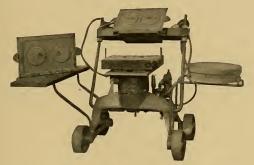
Air-Operated Squeezer Moulding Machine with Pattern Drawn from the Mould.
